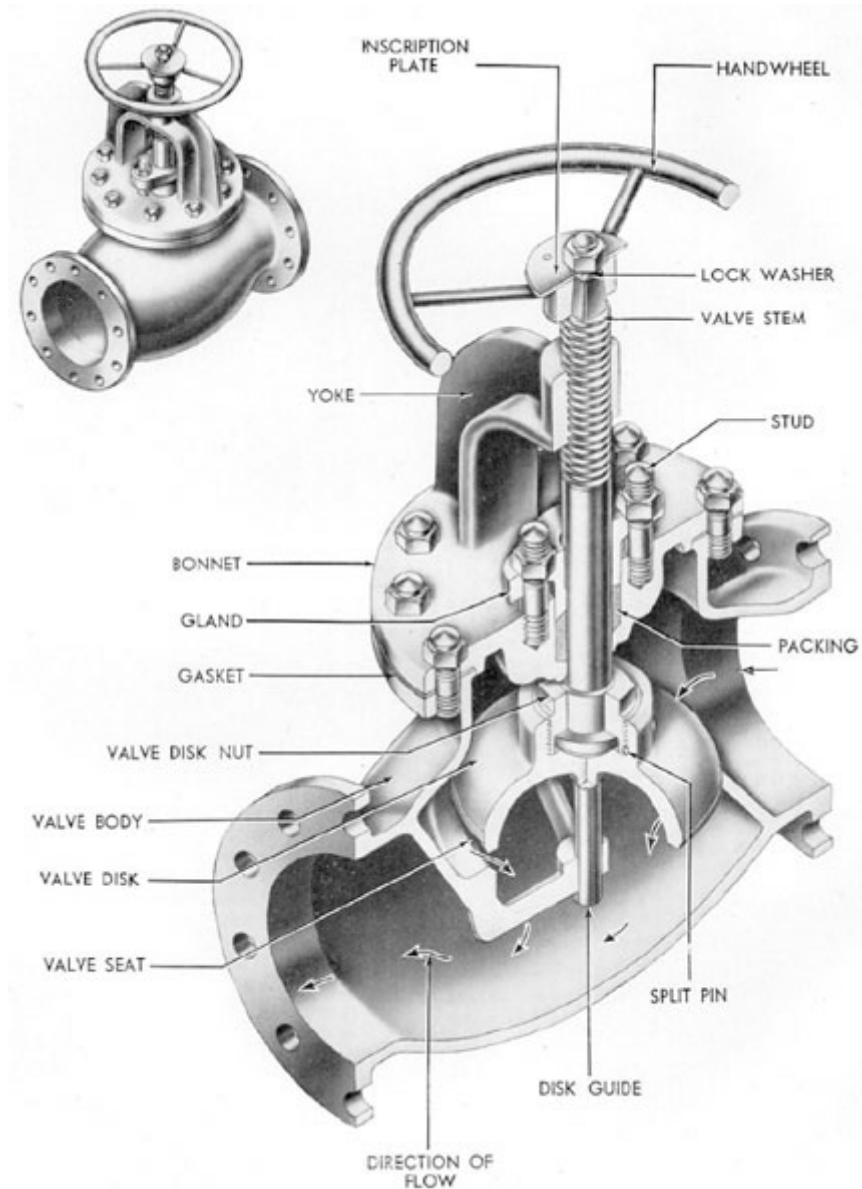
Torpedo tube drain stop valve to WRT tank.
